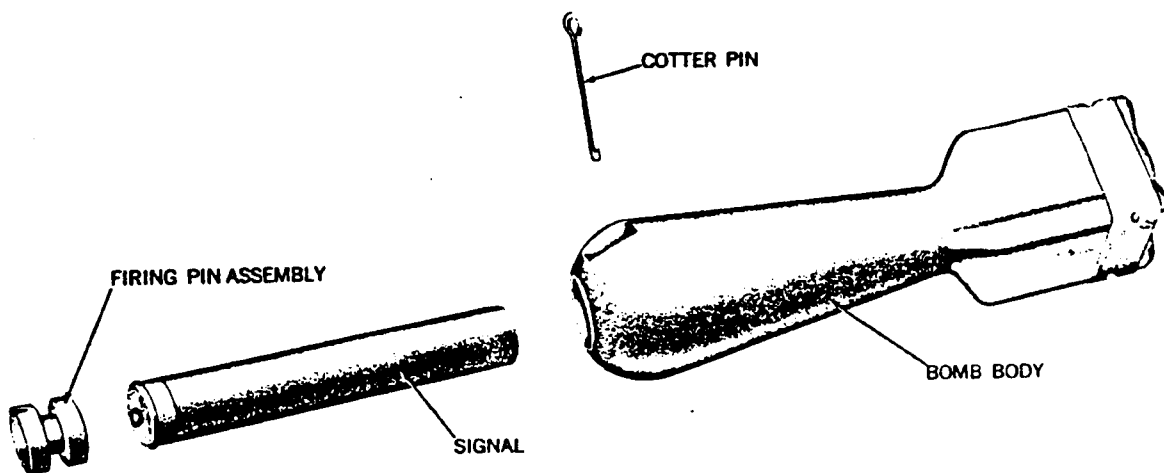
3-lb Miniature Practice Bomb AN-Mk 23 Mod 1, Exploded View.
